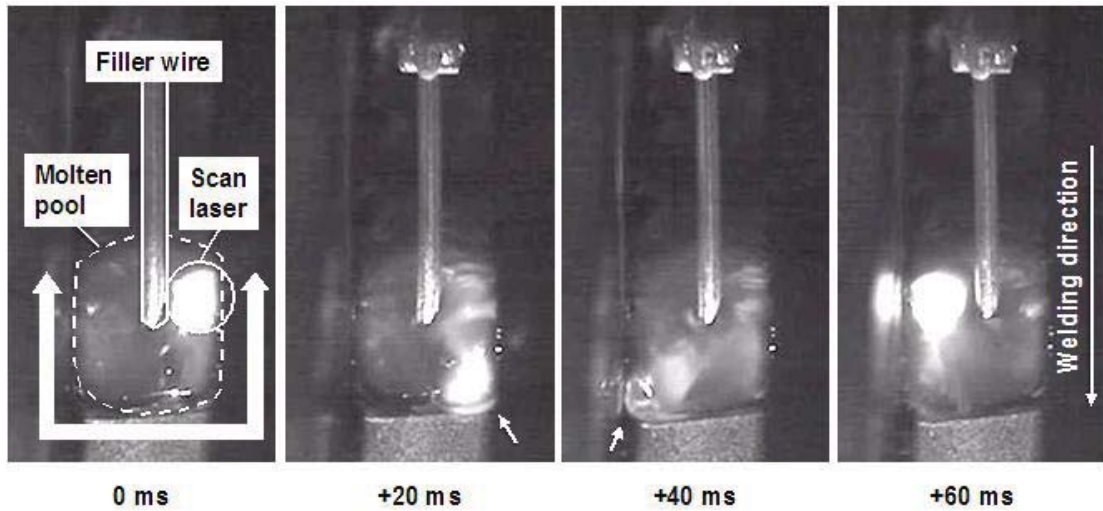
22 High speed camera image during hot wire laser welding with laser scanning method
